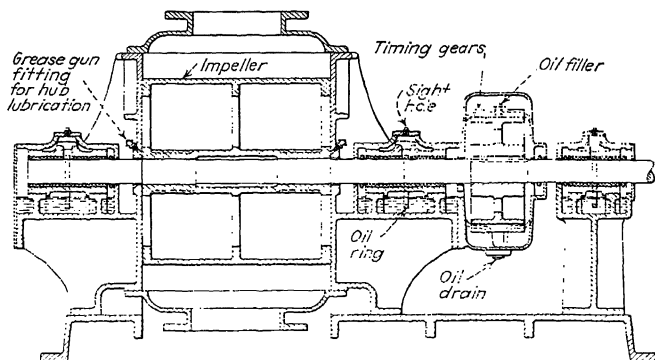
Two-lobe, rotary-displacement compressor with ring-oiled bearings.
